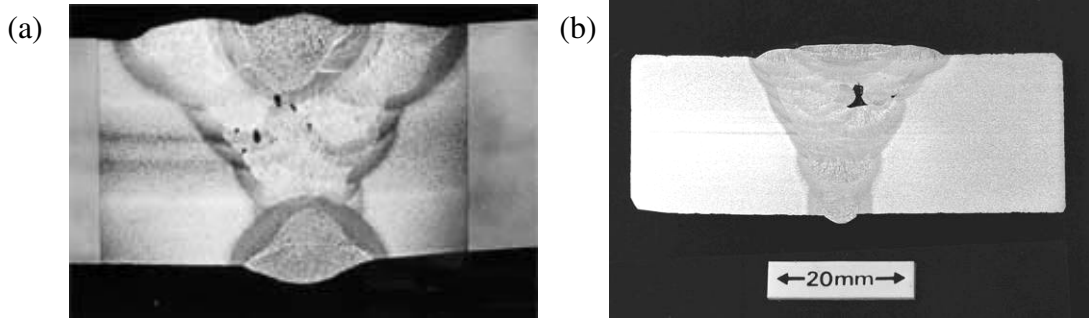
a) Porosity (Courtesy of TWI) [63] and b) Slag Inclusion (Courtesy of BB Welding Services) [64].
